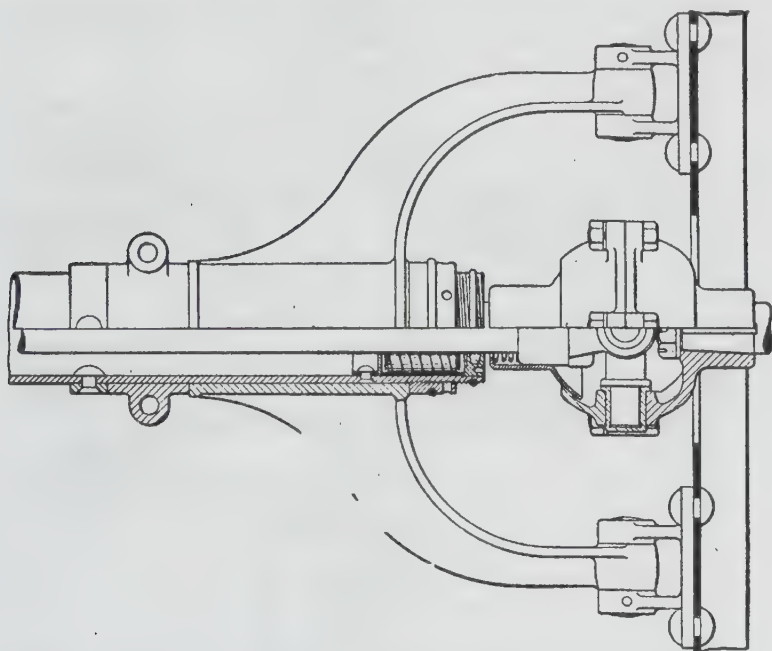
FORKED SUPPORT OF TORQUE TUBE.
